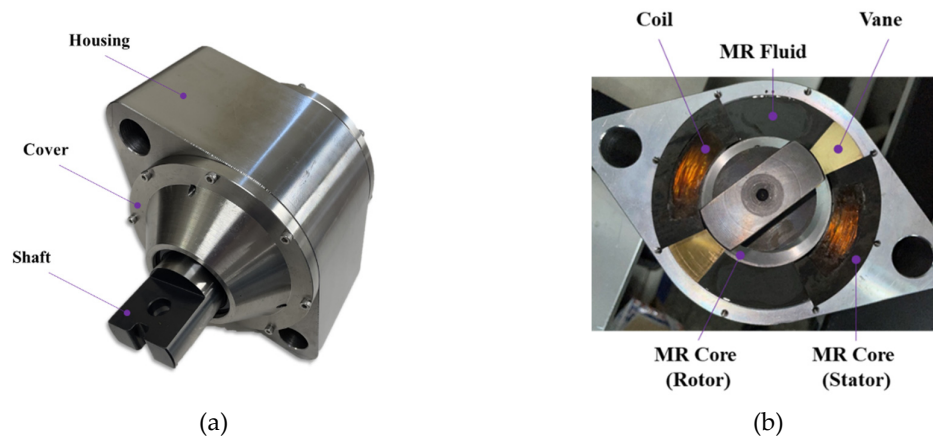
The prototype of the proposed rotary MR damper; (a) assembled, (b) magnetic circuit core.
